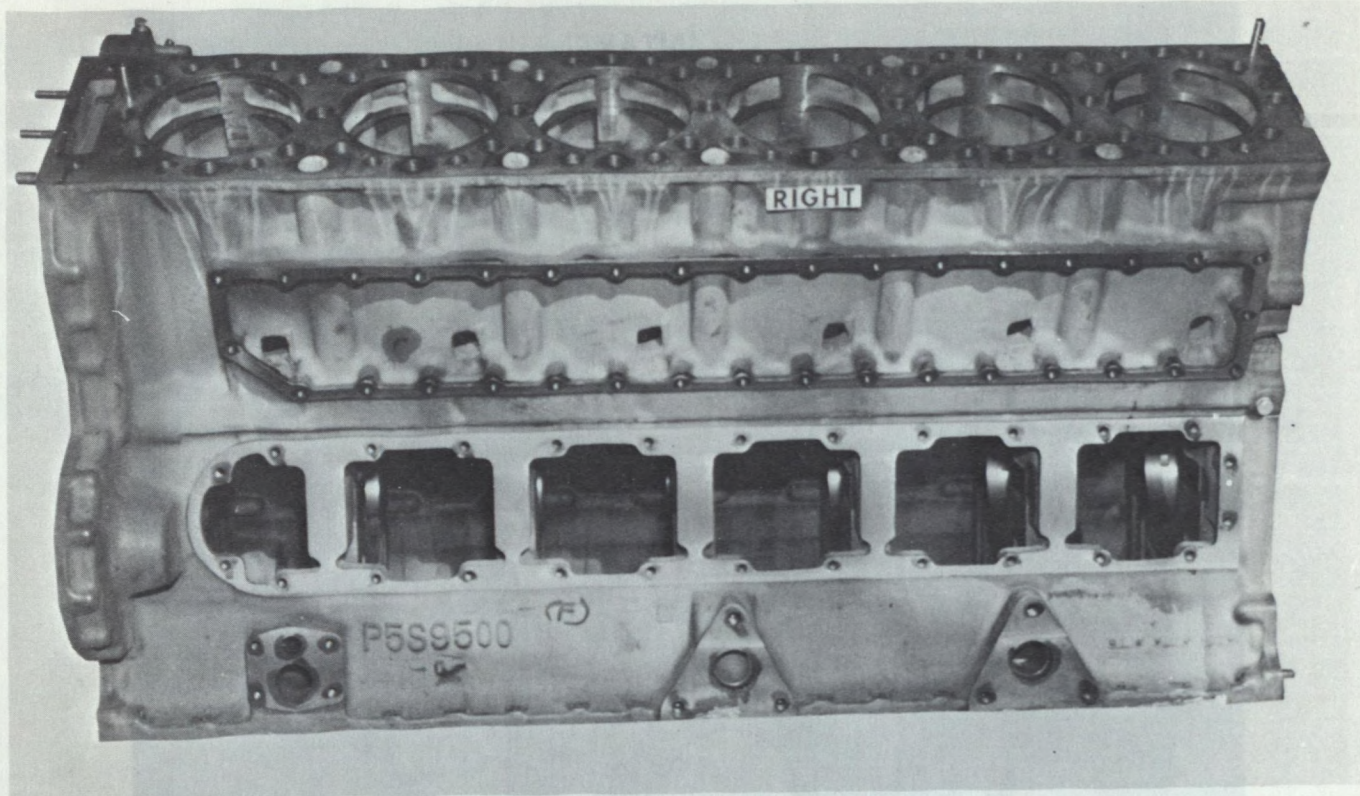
12-cylinder, 1800 RPM engine cylinder block.
